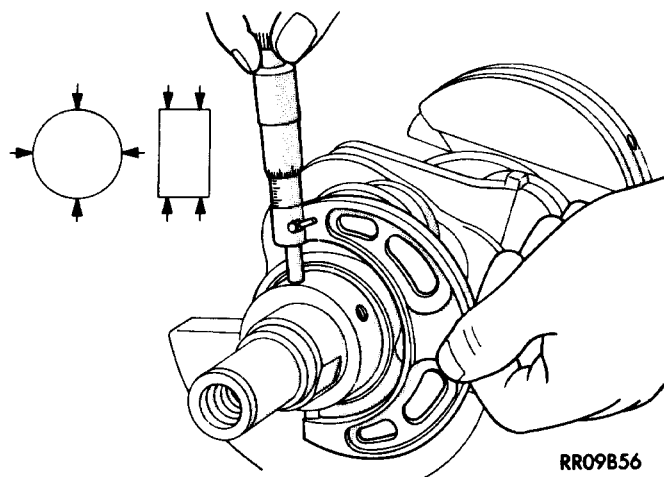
Crankshaft Journal Measurements - Typical INSTALLATION - CRANKSHAFT
